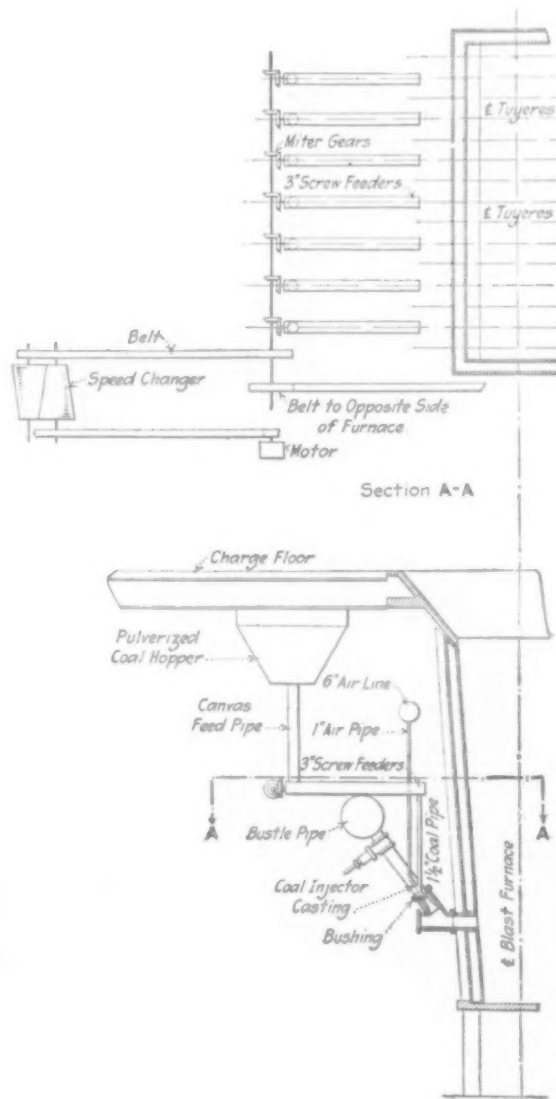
EXPERIMENTAL PULVERIZED-COAL EQUIPMENT OF NO. 5 BLAST FURNACE
